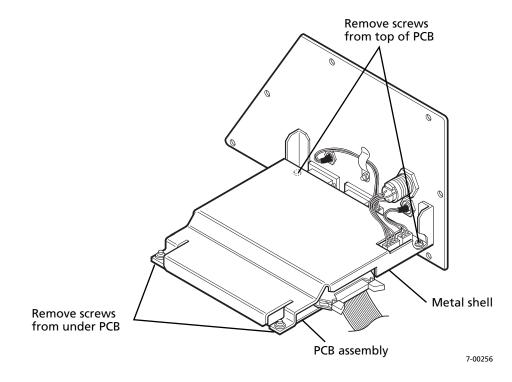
Removing the Communications option PCB assembly from the option plate assembly
